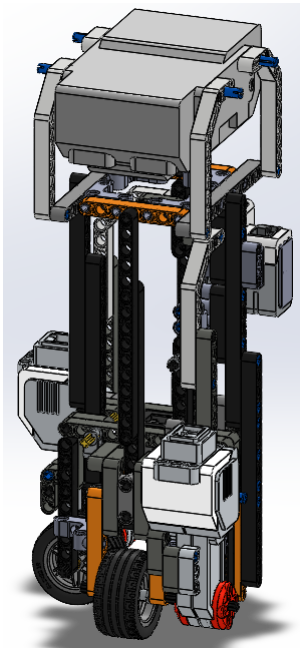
Entire assembly of the EV3BRS in SOLIDWORKS®.
